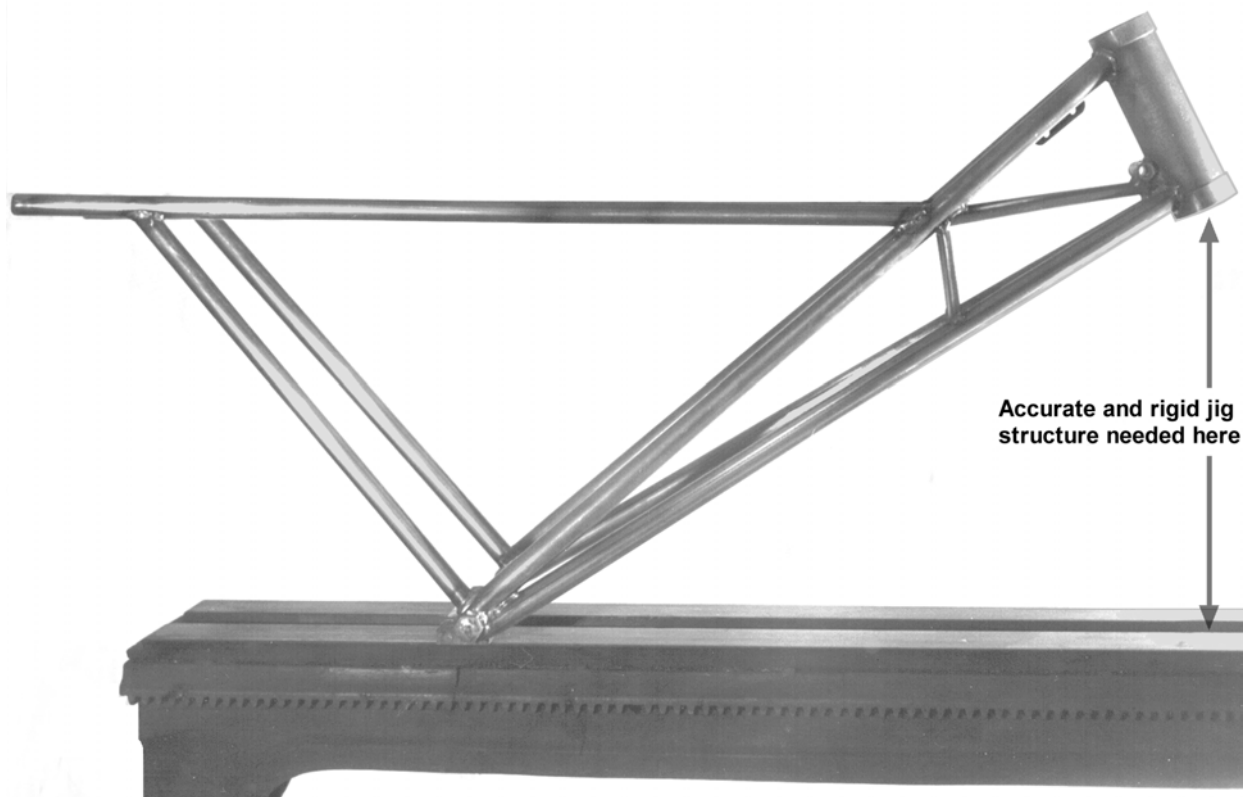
Showing how an old flat lathe bed can provide a solid and accurate basis for a frame jig suitable for one-offs. It is also easy to see that if the frame were to be made in this position, then an additional tall jig structure would need to be made to support the head stock. This extra structure will reduce accuracy and rigidity.
